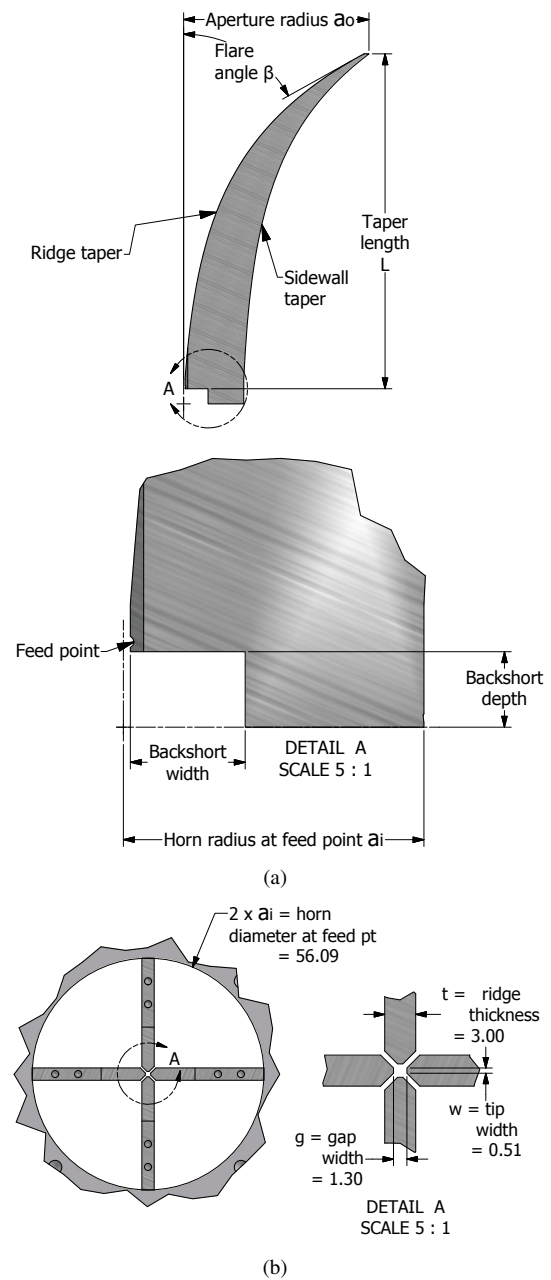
(a) Ridge side view, (b) view from bottom of feed looking up. The dimensions shown in (b) are as-built dimensions of the QRFH in millimeters. The remaining final dimensions of the QRFH presented herein are: taper length for the ridges and the sidewall are 156.3mm and 151.8mm, respectively; back-short depth and width are 7.04mm and 10.72mm, respectively; the ridge and sidewall aperture radii are, respectively, 83.5mm and 85.8mm; the exponential taper opening rates (see Section II-B) for the ridges and sidewall are 0.0213 and 0.0219, respectively.
